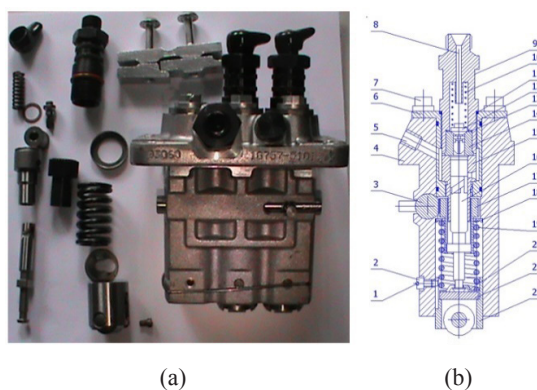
Structure of high-pressure pump of Kubota D1703-M-DI Diesel engine. (a) Actual image of high-pressure pump, (b) longitudinal section of a pump unit. 1. Locking ring, 2. Locating pin, 3. Pinion rack, 4. High-pressure pump body, 5. Oil inlet line, 6. Adjusting tube, 7. Retainer bolt, 8. Fuel to injector, 9. High-pressure hose connector, 10. High-pressure valve spring, 11. Oil seal, 12. High pressure valve, 13. Copper gasket, 14. High-pressure valve seat, 15. Cylinder, 16. Piston, 17. Pipe teeth, 18. Upper spring stop plate, 19. Piston return spring, 20. Lower spring stop plate, 21. Adjusting pad, 22. Roller head.
